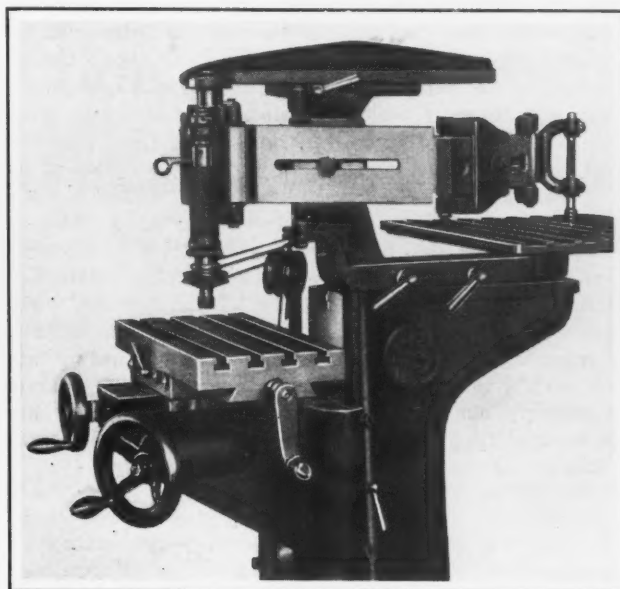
Machine equipped with Pantograph of Type represented at *C*, Fig. 1
